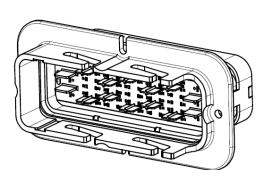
SRC 60+6 Mixed Power Blade Assembly Housing Mating Interface
